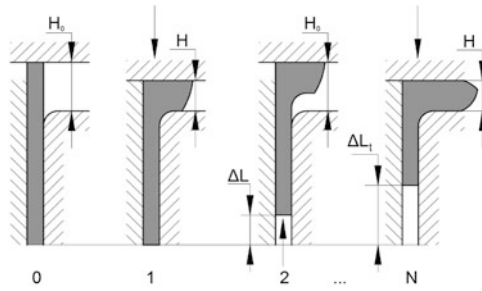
Scheme of the rotary forging of thickened flanges with multi-upsetting:  $\Delta L$ —feed of the workpiece at each step of upsetting;  $\Delta L_1$ —the total feed of the workpiece
